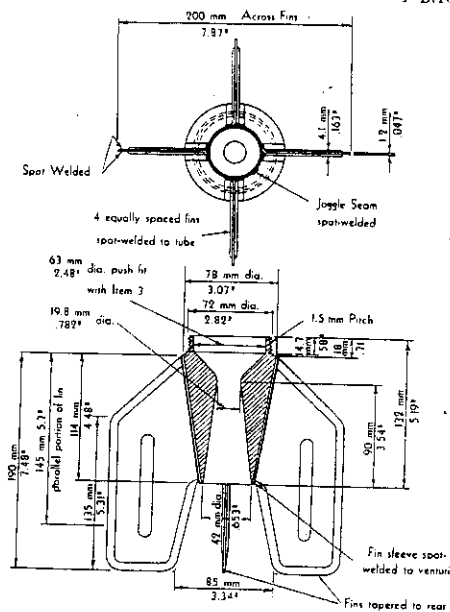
Drawing of venturi assembly for 8-cm HE projectile.
